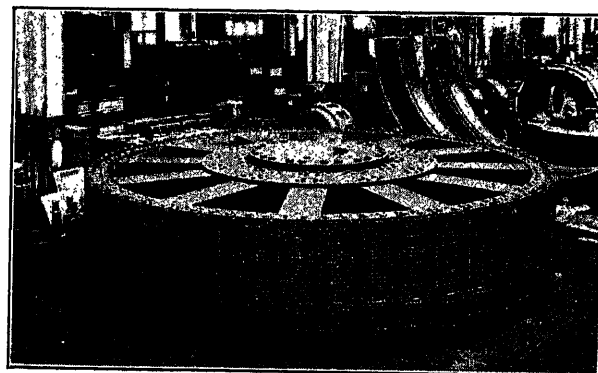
FABRICATED ROTOR WITH LAMINATED RIM
